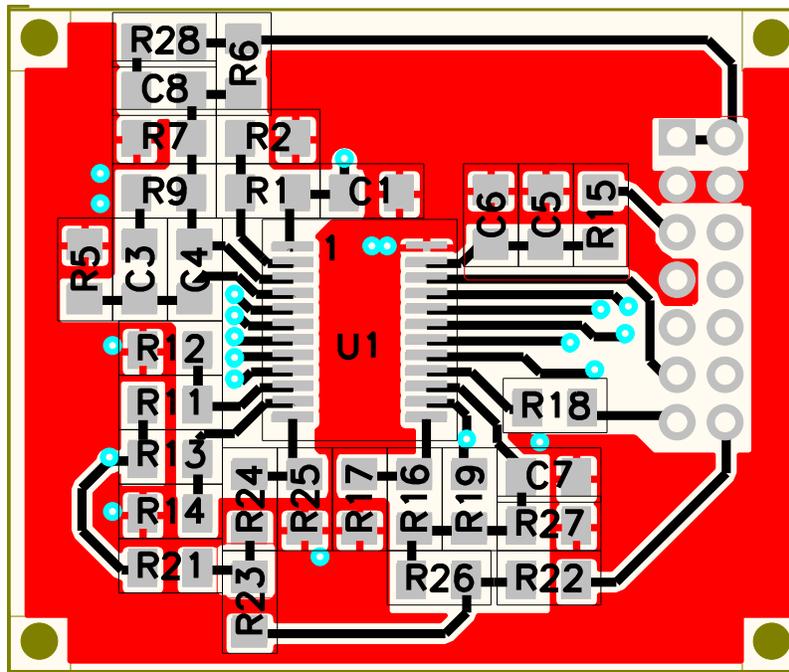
UCC27714EVM-551 Daughter Controller Card Top Layer Assembly Drawing (top view)
